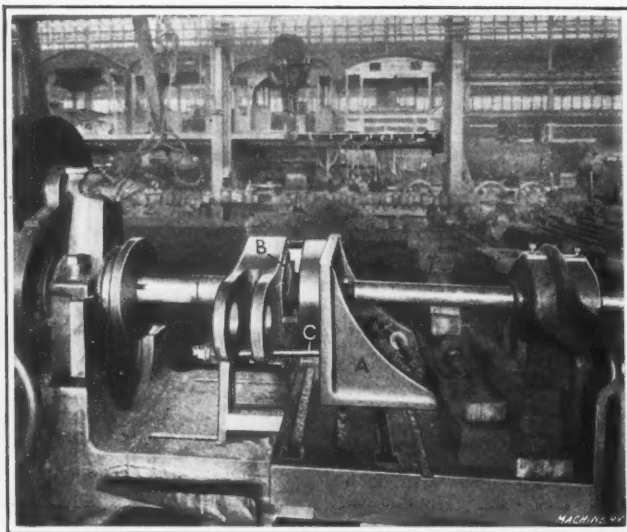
Boring the Bearing Brass of a Locomotive Main Connection Side-rod
